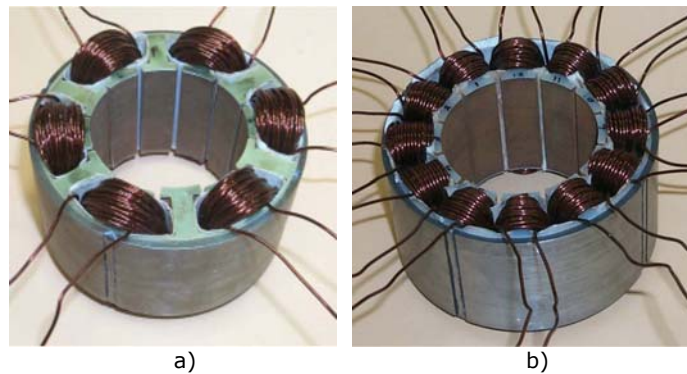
Stators of 12-slot/10-pole motors: a) design with single-layer winding, b) design with double-layer winding [2].
